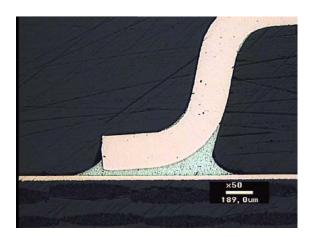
50x Magnified Optical Microscope Image of a Well Soldered QFP Lead Based on a Robust Pad Design
